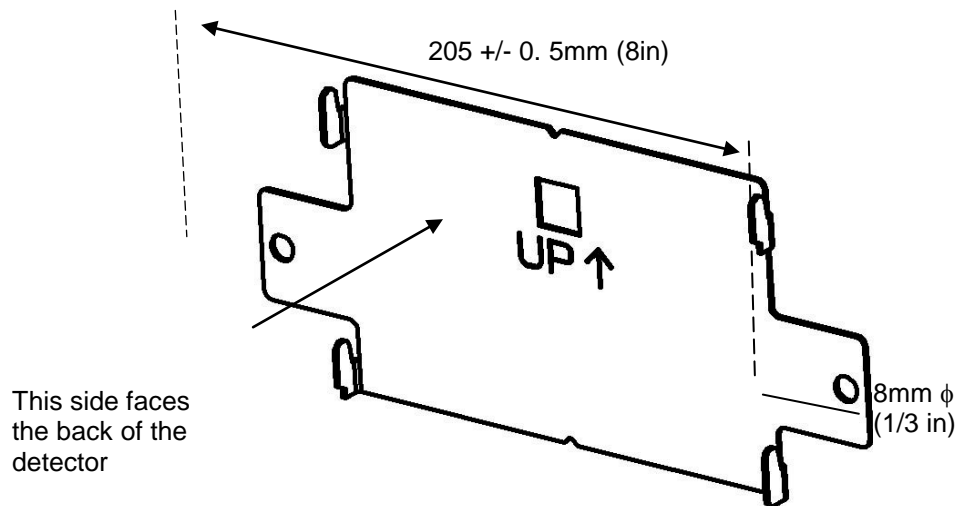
Hole Dimensions and Orientation of Mounting Bracket
